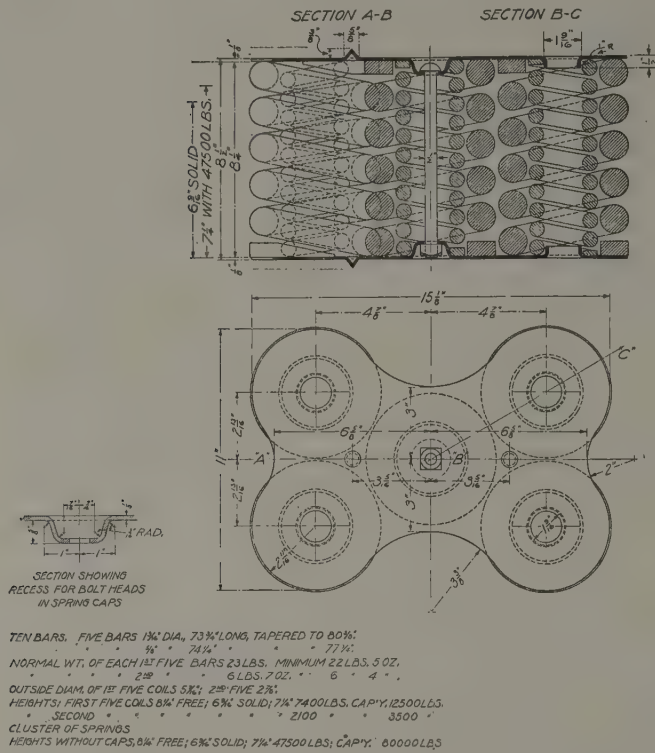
Spring for 140,000 lb. Cars with Cast Steel Side Frame Trucks. (M. C. B. Sheet 31A.)
